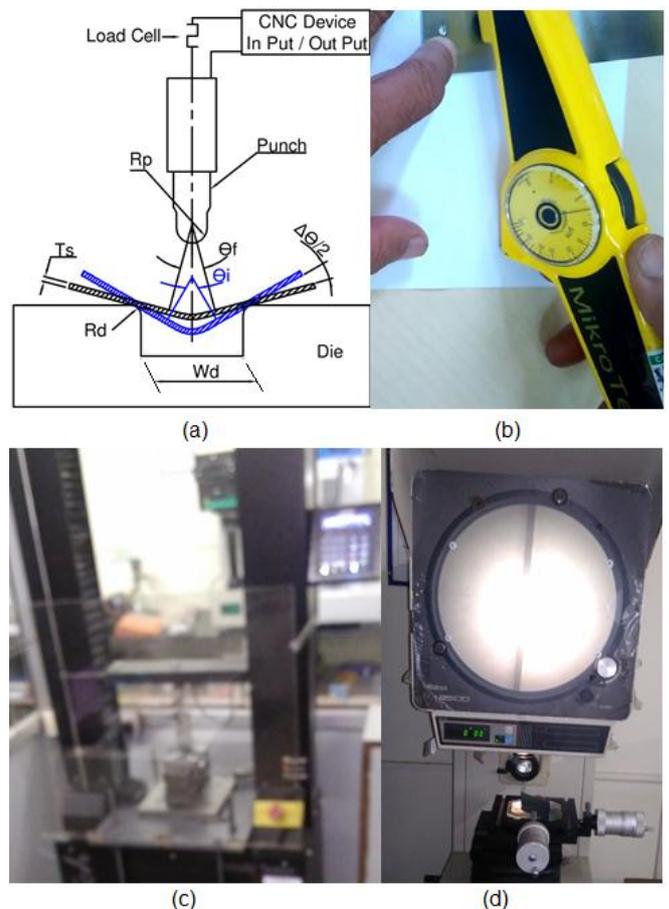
Experimental setup (a) schematic diagram of air bending and spring back (b) measuring the galvanizing thickness (c) bending setup on universal testing machine (d) profile projector for measurement of final bent angle.
